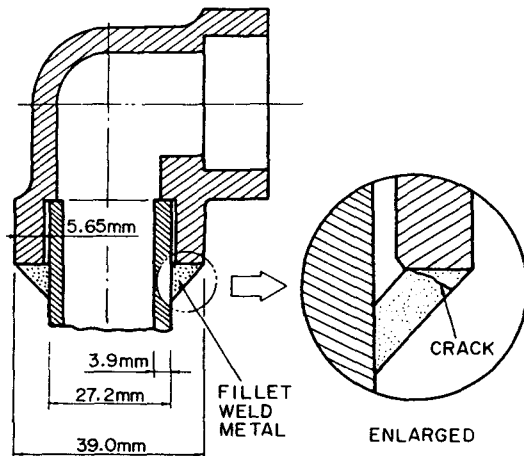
Fatigue crack started from root of socket welds.
